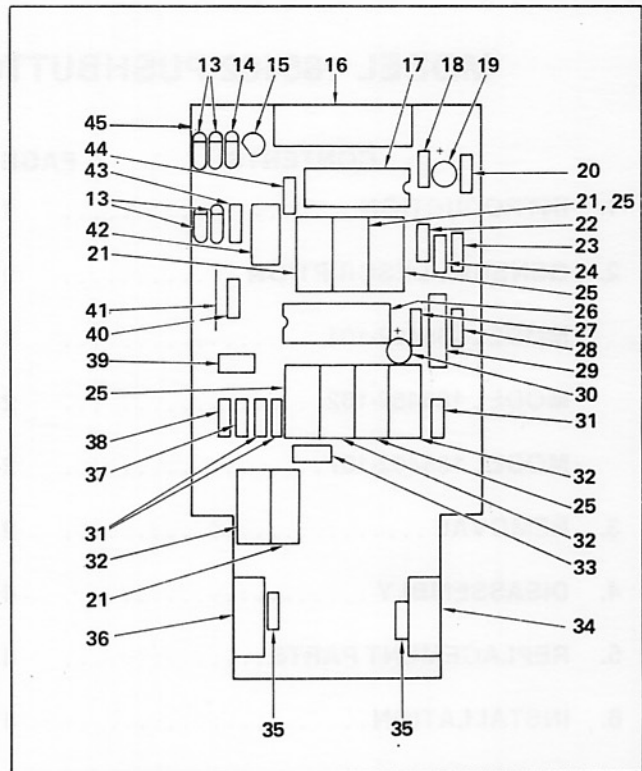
Model 185462 Pushbutton Dial Network Assembly, Exploded View
